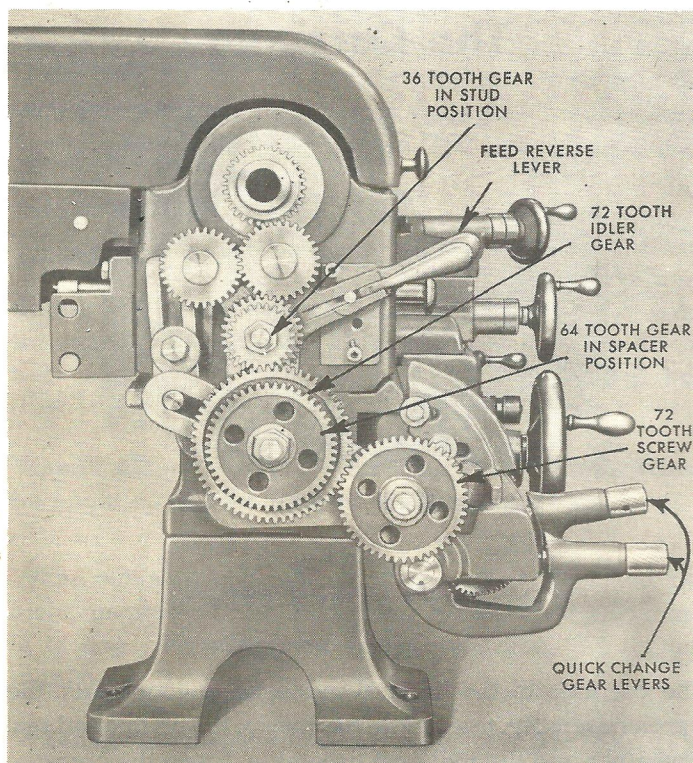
CHANGE GEAR TRAIN ON LOGAN QUICK CHANGE GEAR LATHE
